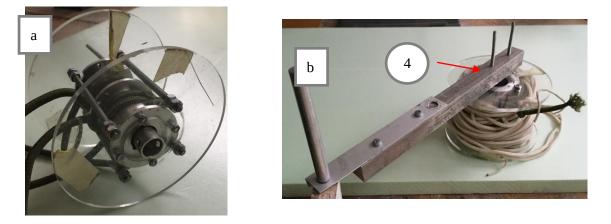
(a) Quill fixing the mandrel with the stand (b) Crank and mandrel's mounting rods
